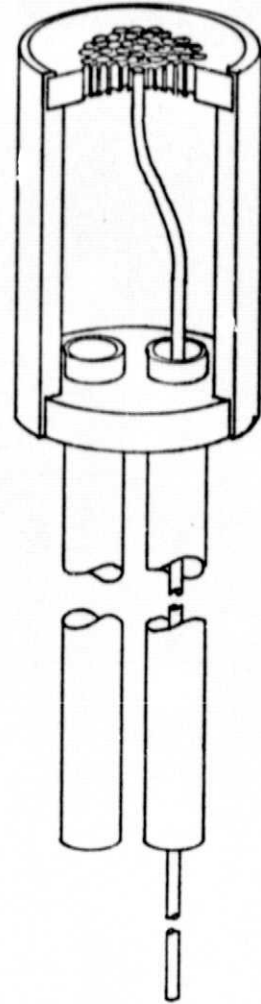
CHS, JET TUBE AND GAS SUPPLY TUBE SOLDER JOINTS WITH BOTTOM OF CHS HOUSING
